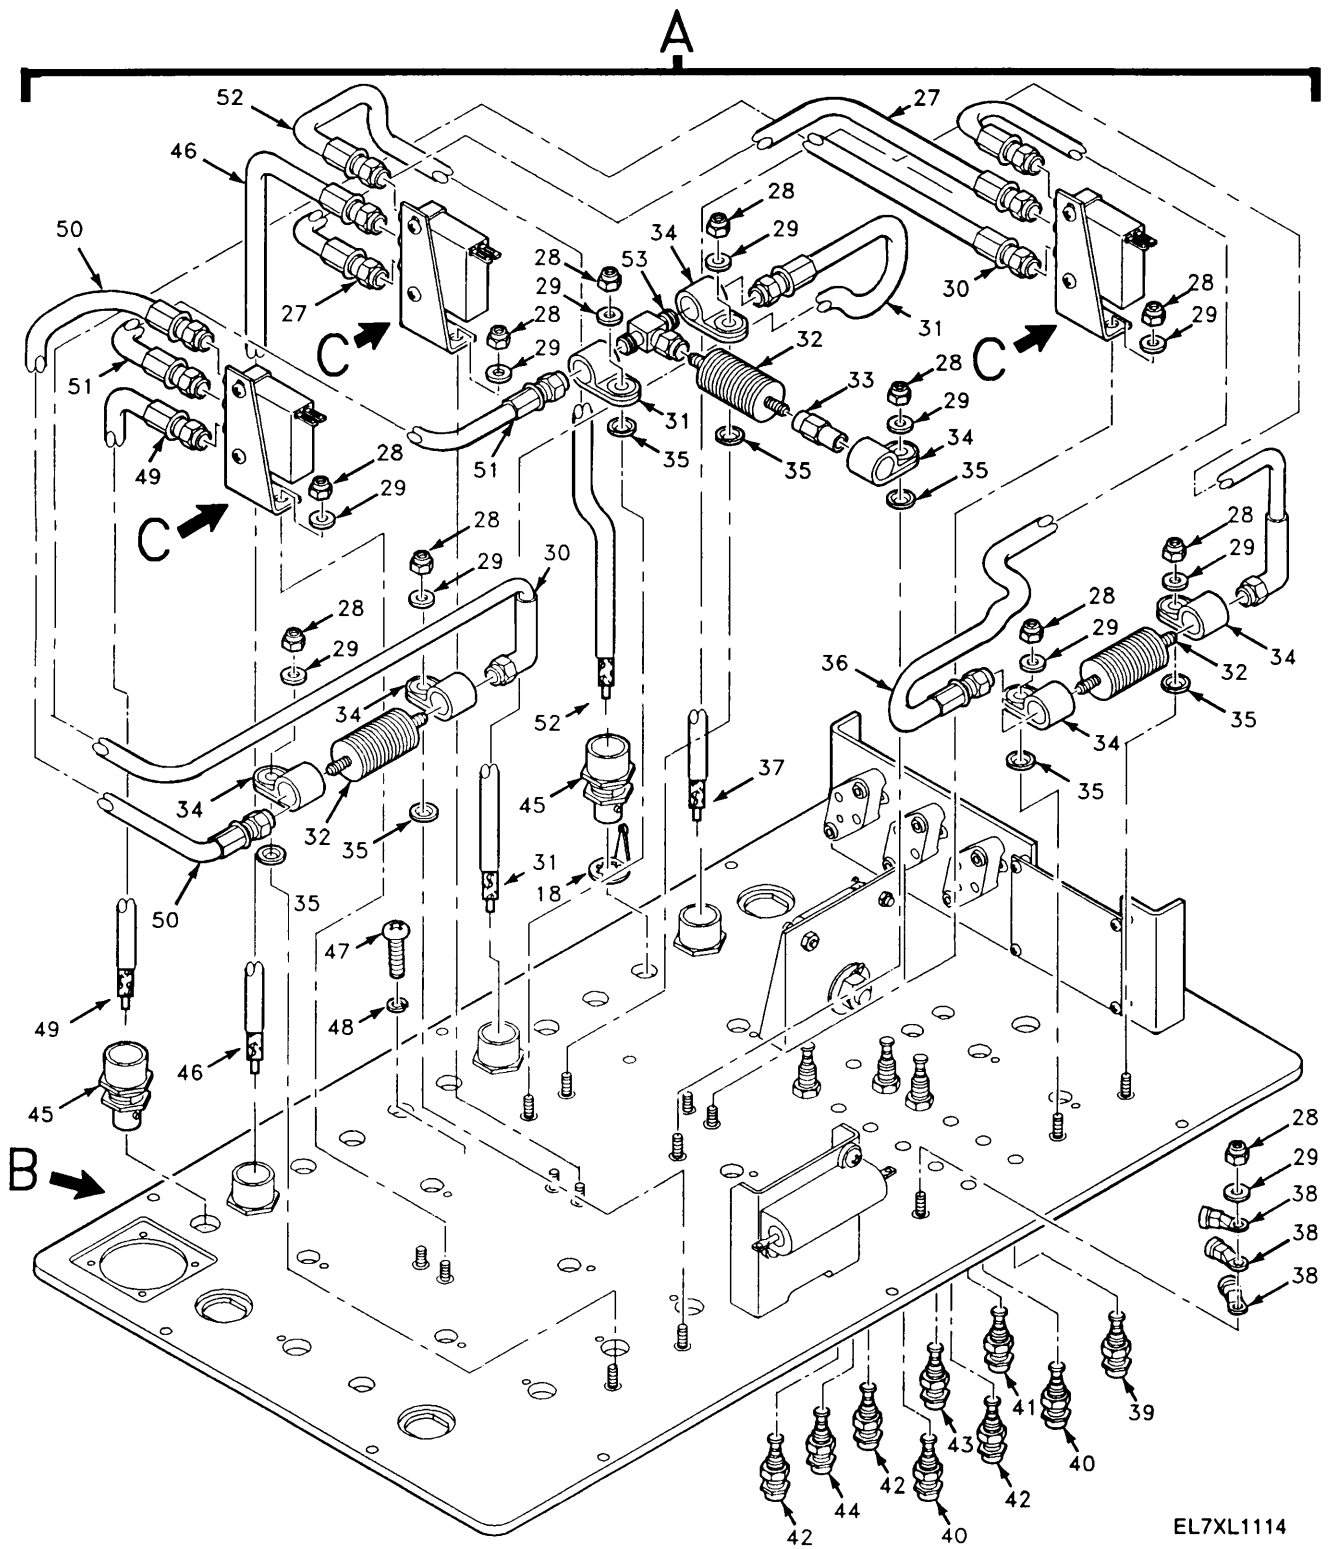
Test Adapter Front Panel Repair. (Sheet 1 of 3)
